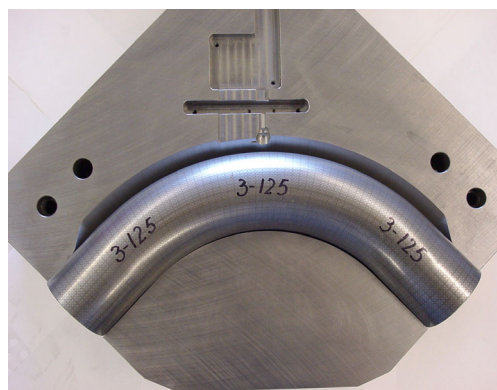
Section of hydroform die and bent tube for outside radius expansion tests.
